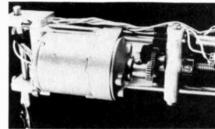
MOTOR AND GEAR arrangement used to drive threaded rod, as described in text.
